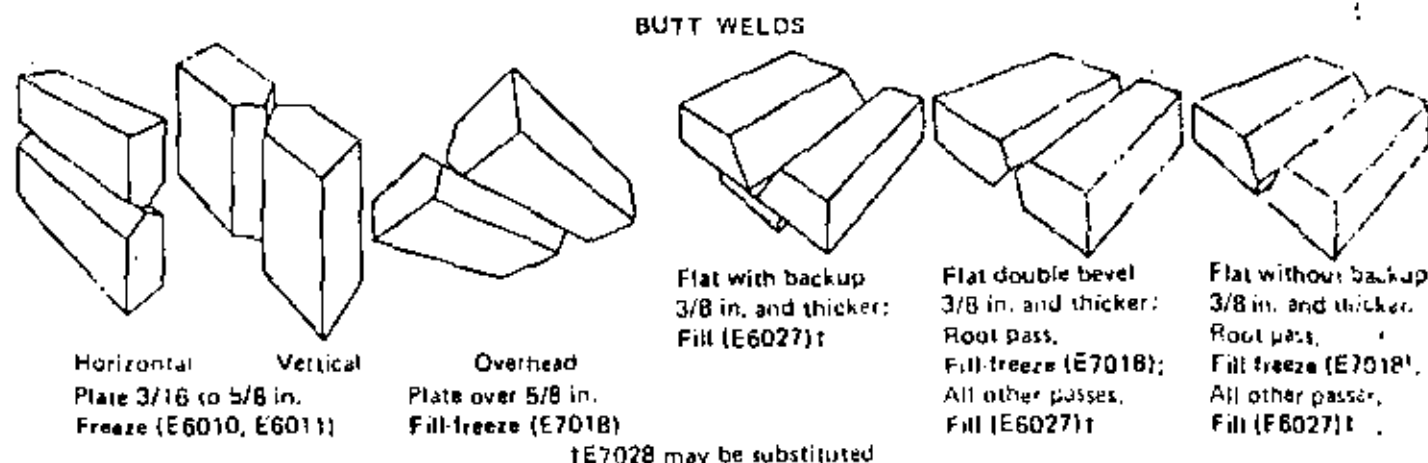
Guide to selection of electrodes for butt welds
